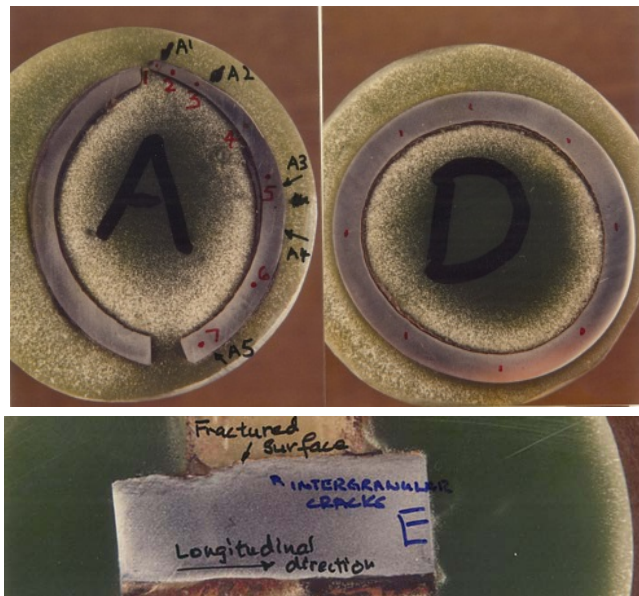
Macro view of Metallographic Specimens. A & E taken from failed tube and D from inlet elbow.
